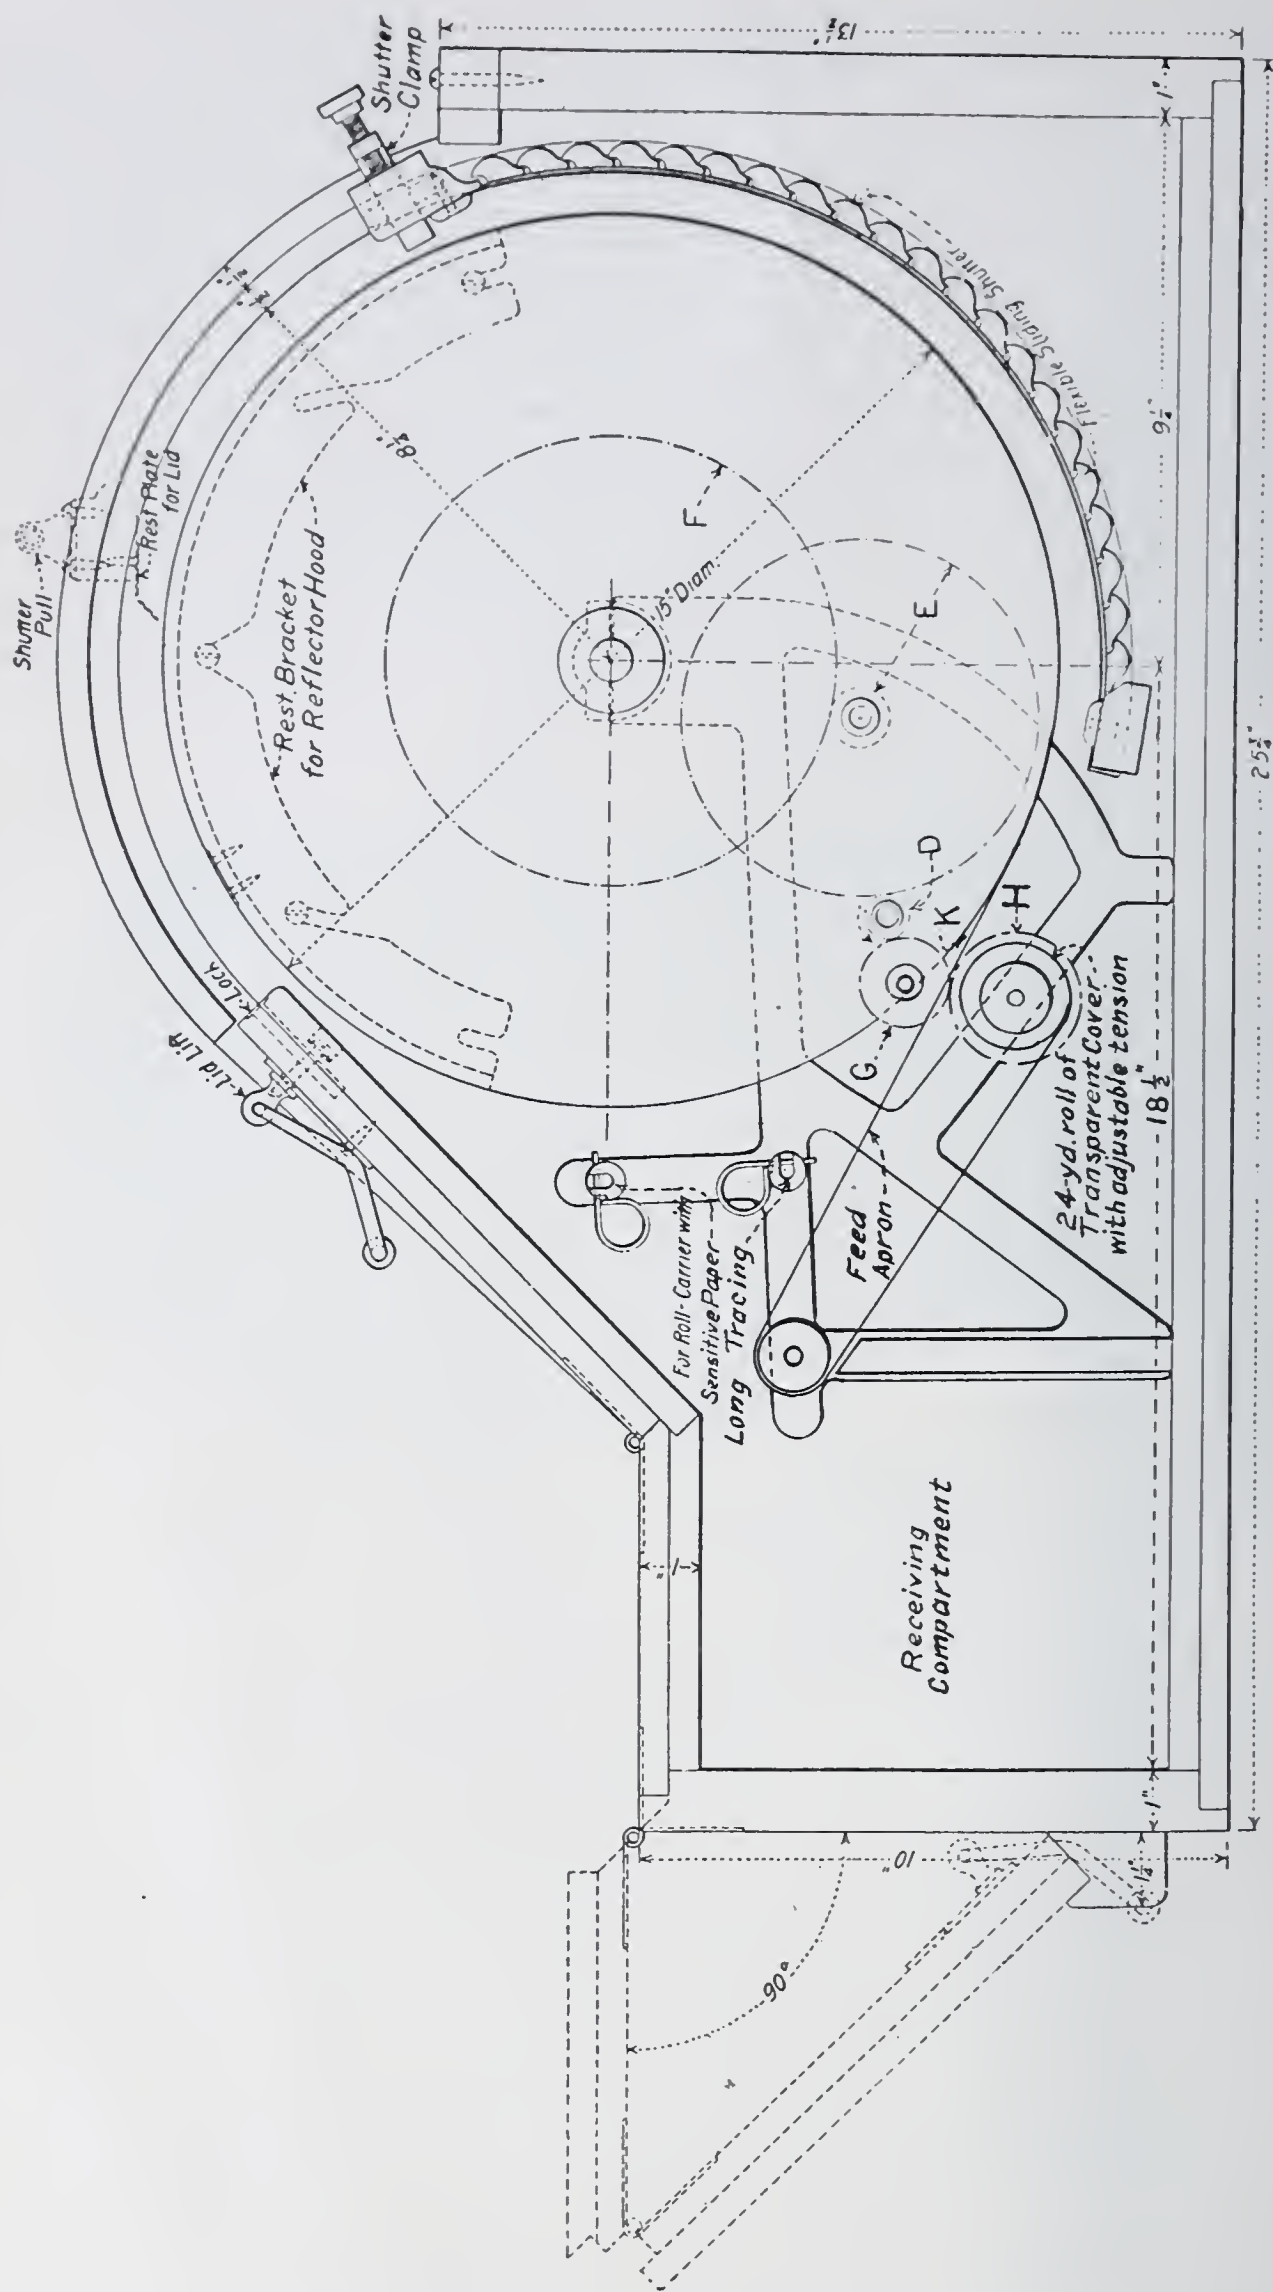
STAR PHOTO-PRINTING MACHINE, END VIEW OF INSIDE MECHANISM.
